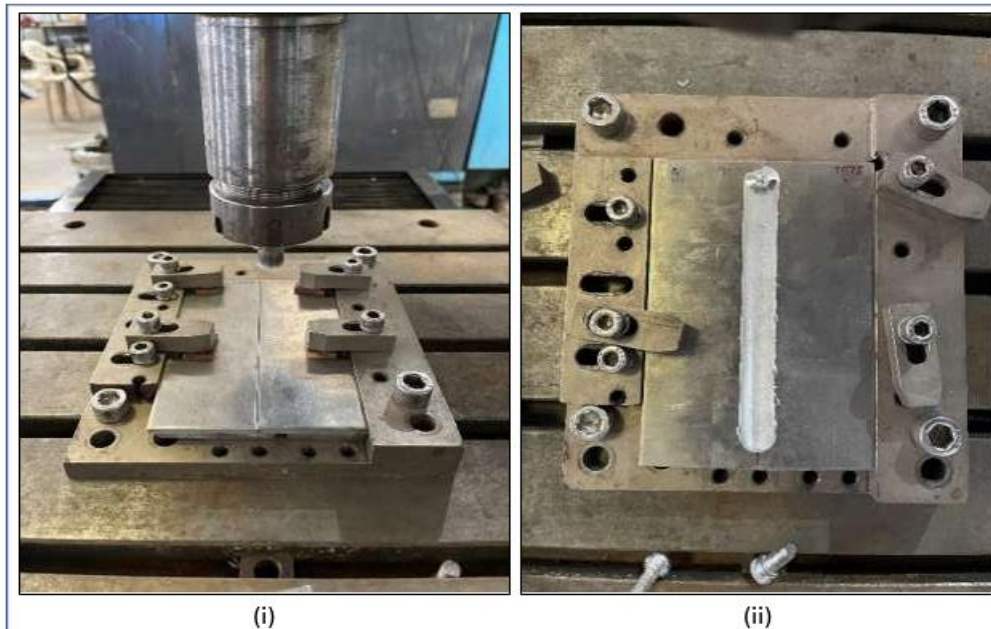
(i) Material clamped for FSW process (ii) FSW welded joint
